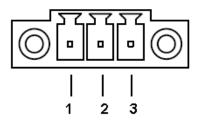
3-Pin 3.81mm-Spacing Plug-in Terminal Block (Socket)
